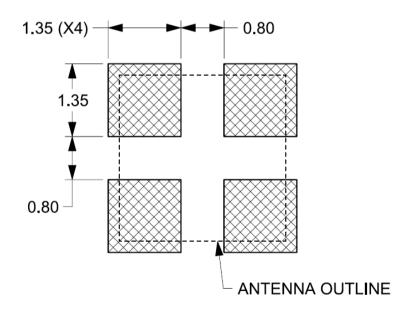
PCB BOARD SCHEMATIC PICTURE
